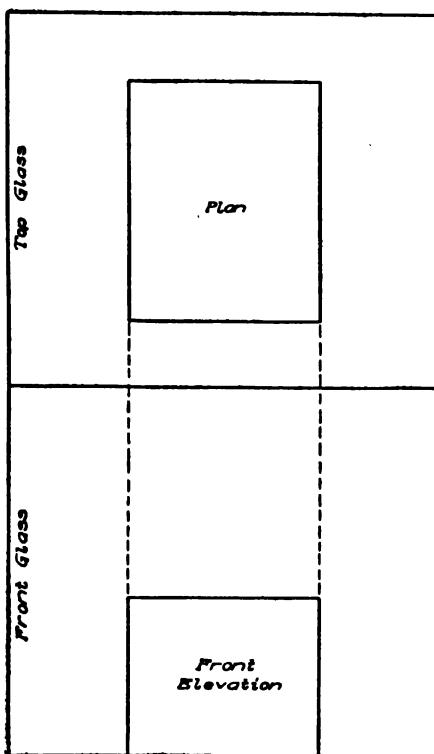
Plan and Elevation of Box Shown in Fig. 98
